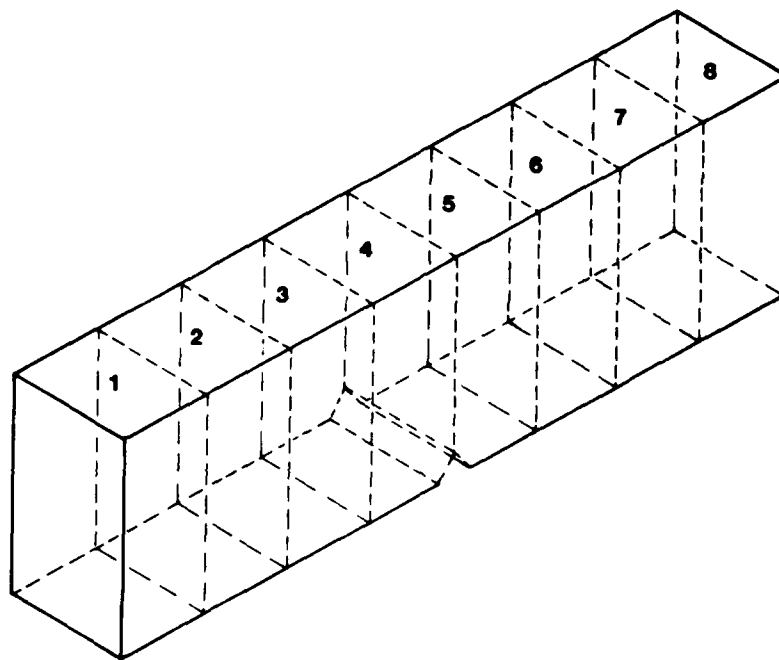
Short Bar Specimen Locations in the Three-Point Bend Specimen.
